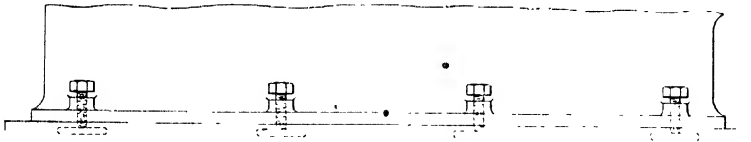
SYSTEM OF LEVELLING BORING-MACHINE END
